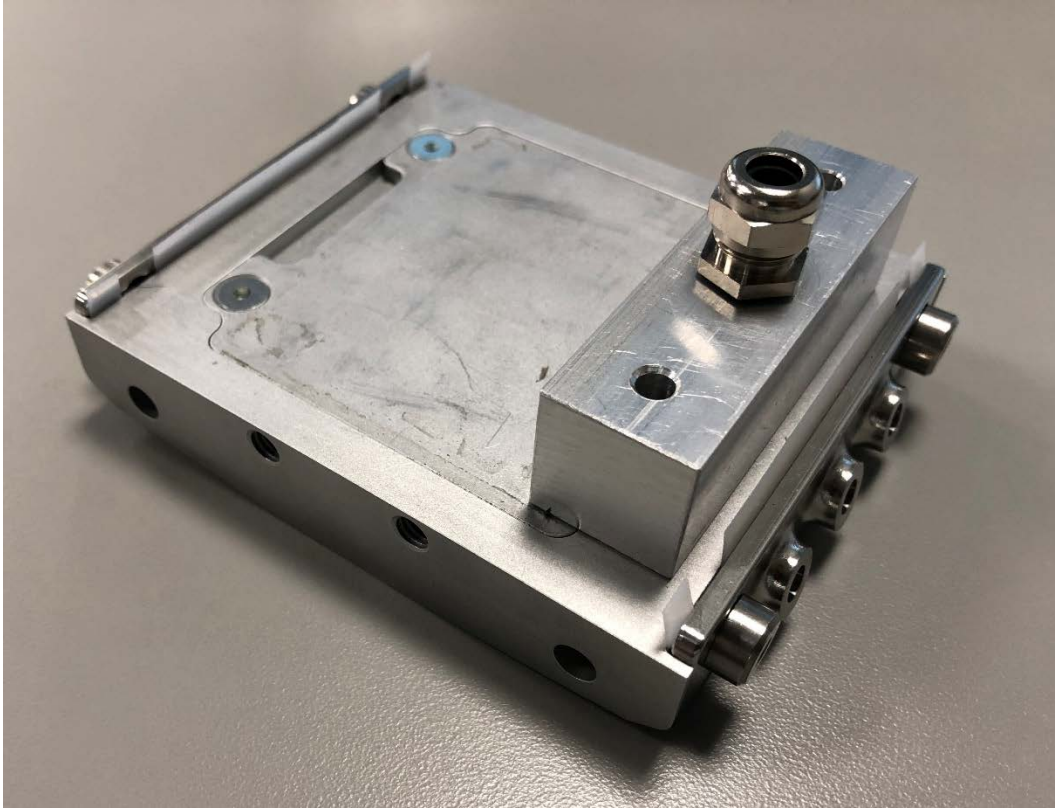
A photo of the final design of the EMAT prototype with aluminum housing.
